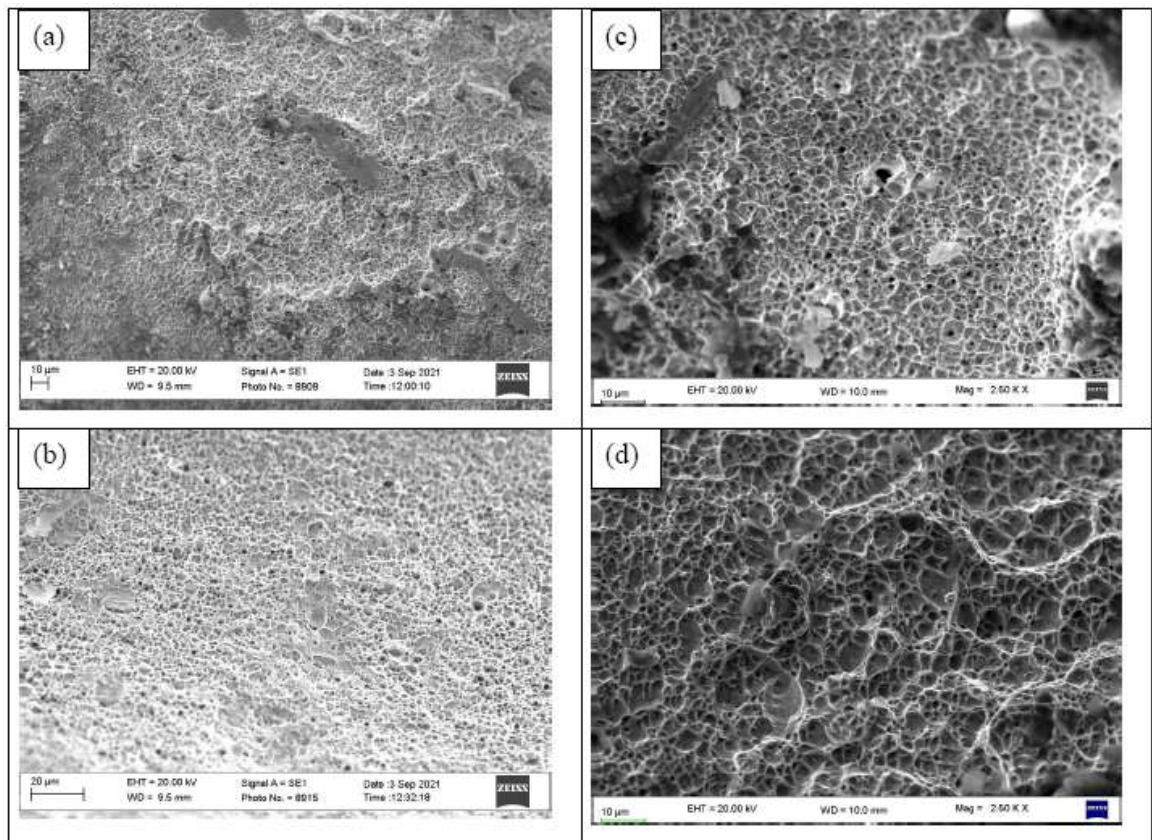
14 FESEM fractography of tensile fractured surface of (a) CMT sample -9 and (b) U-CMT sample-6, (c) and (d) are higher magnification views
